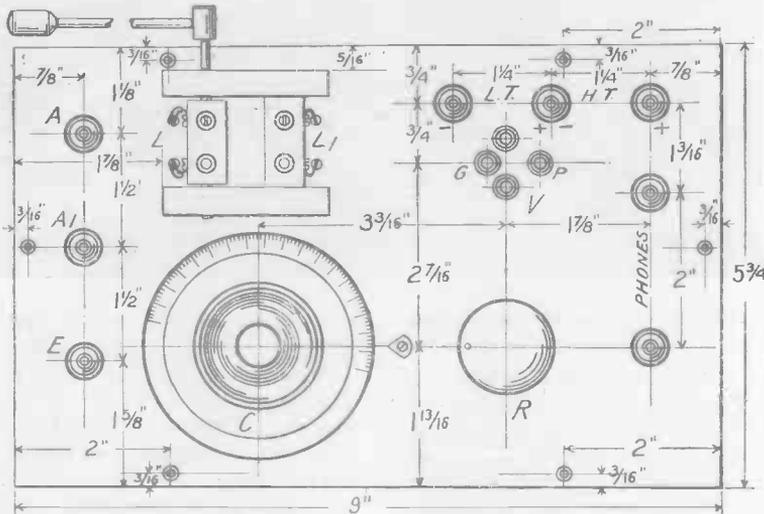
The layout of the panel showing dimensions and purposes served by the terminals.
